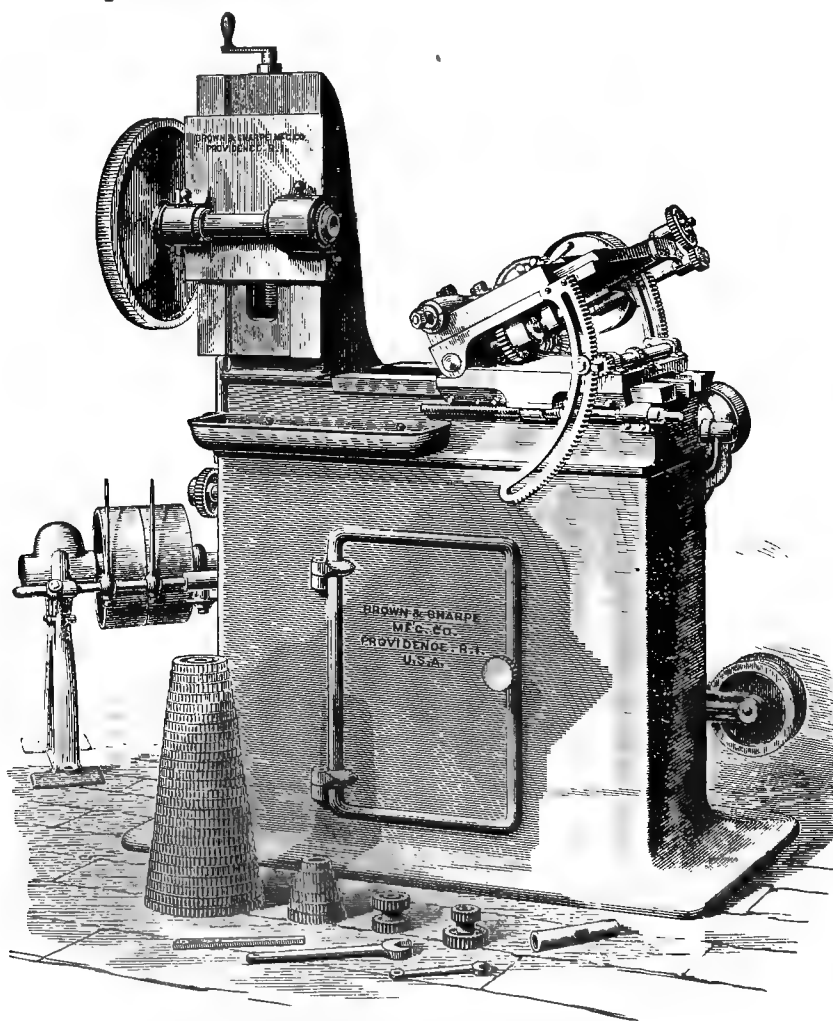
Brown & Sharpe's automatic gear cutter.
